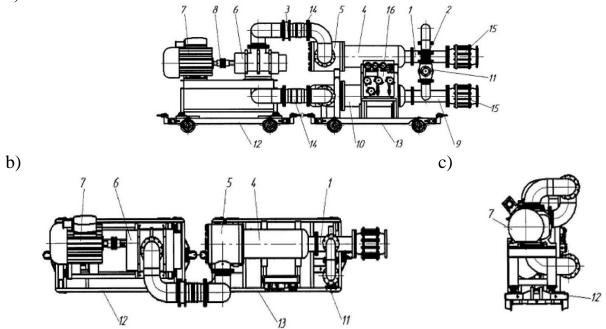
Plant for gas drainage from the underground beds: a) front view; b) top view; c) side view
